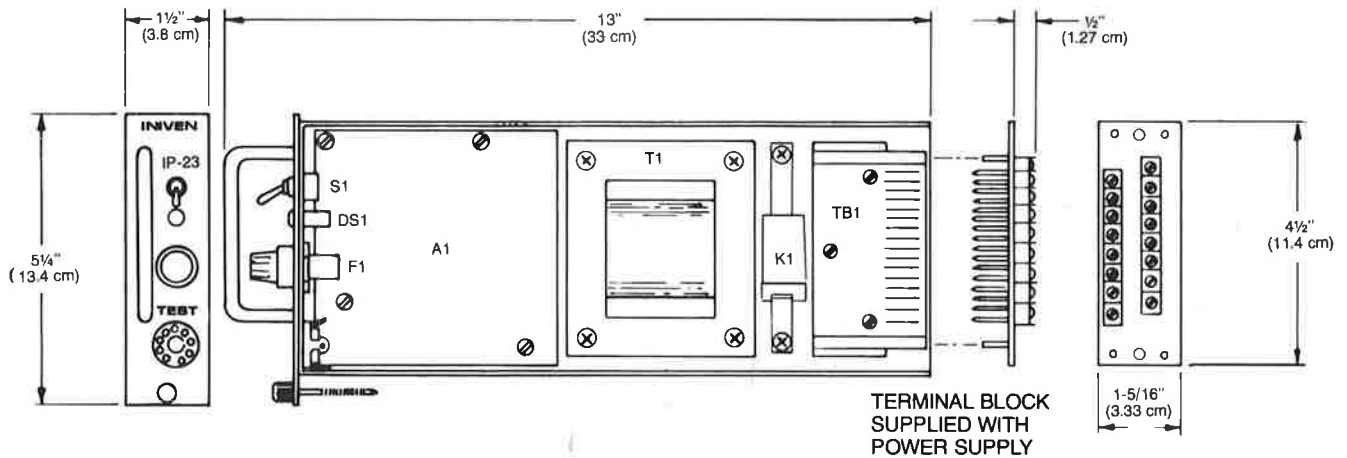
IP-23/IP-23R Power Supply — Dimensions and Component Identification.
